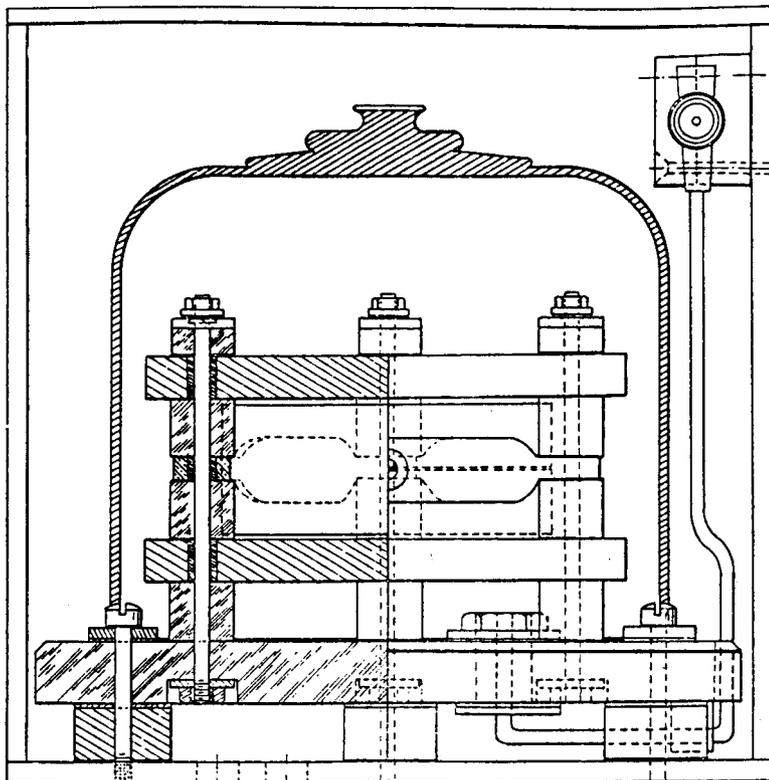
Assembly of quartz plate and mounting within bell jar, primary no. 25.
